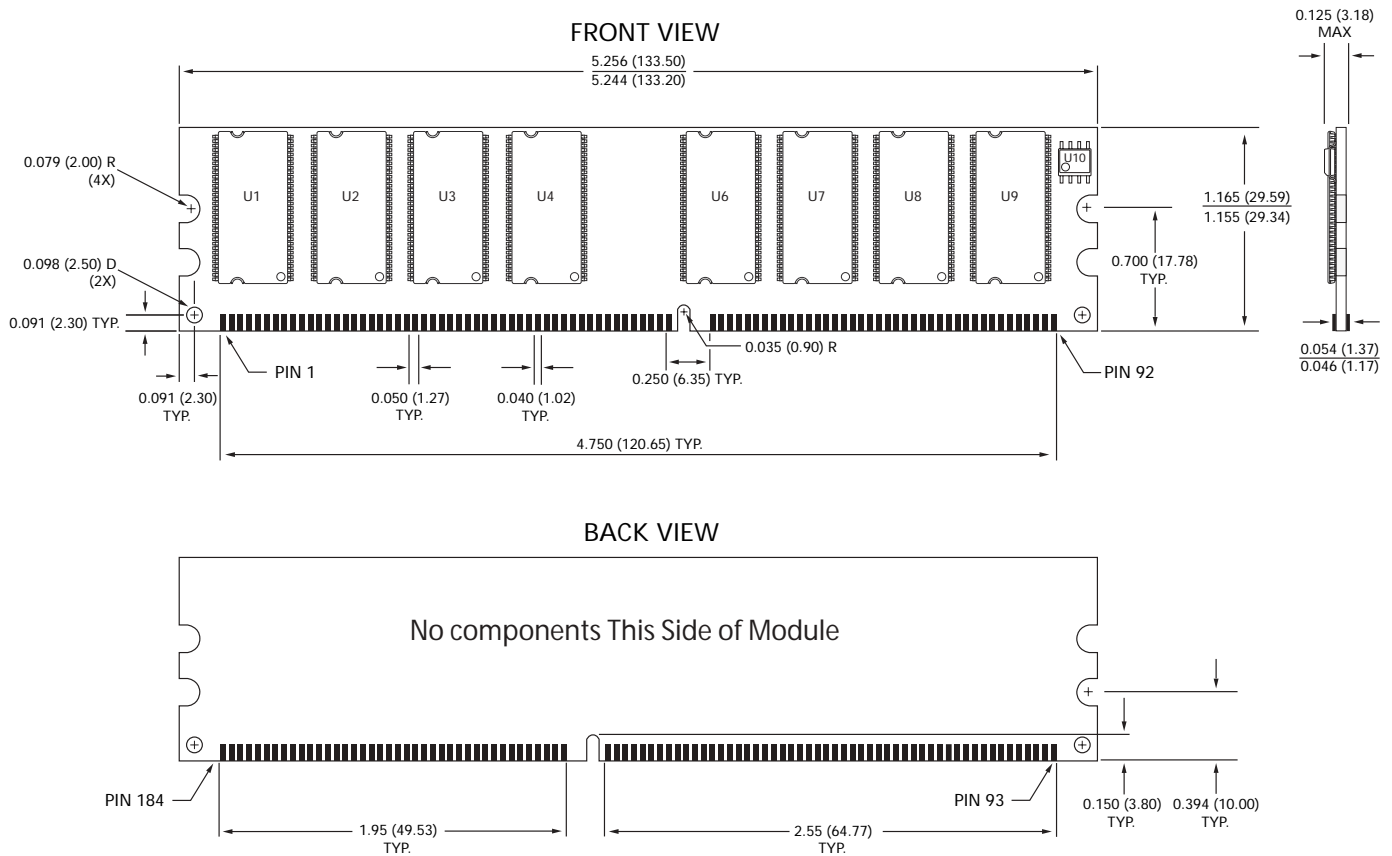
184-Pin DIMM Dimensions – Standard PCB
